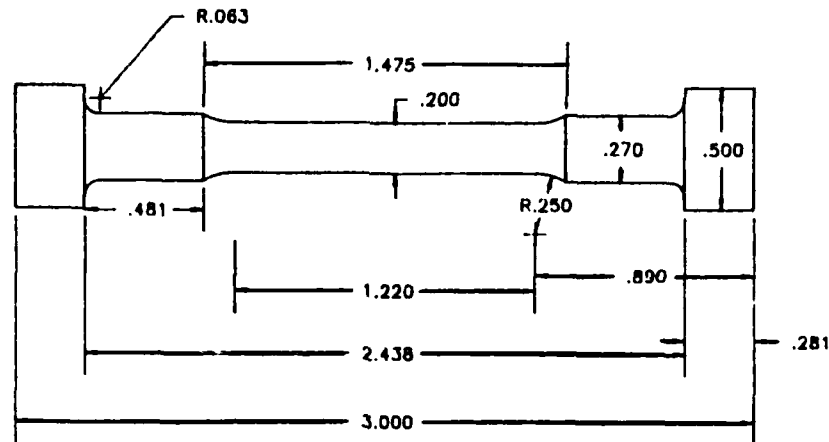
Tensile Test Buttonhead Design. These samples were machined from 0.5 inch (12.7mm) diameter extruded bars. (All numerical values provided in inches).
